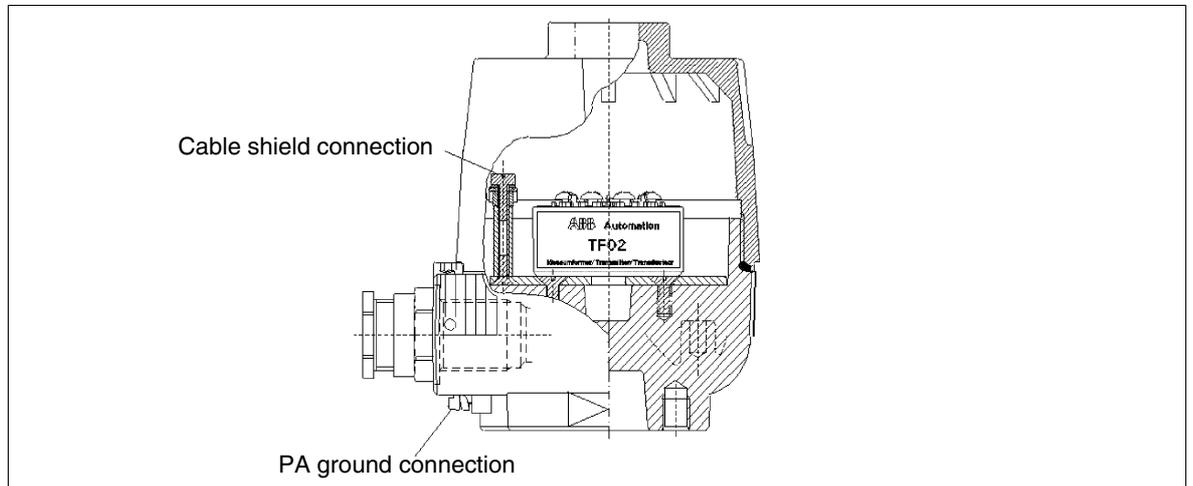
Detail Drawing TF202 / TF202-Ex
